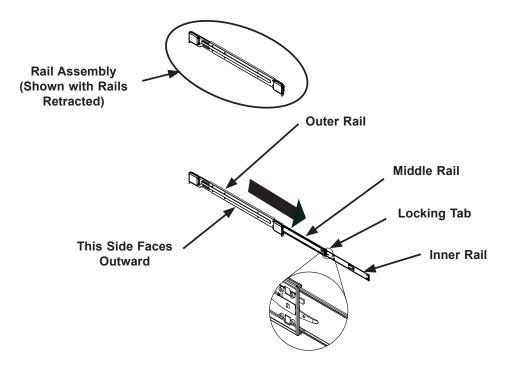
Identifying the Outer, Middle and Inner Rails (Left Rail Assembly Shown)
